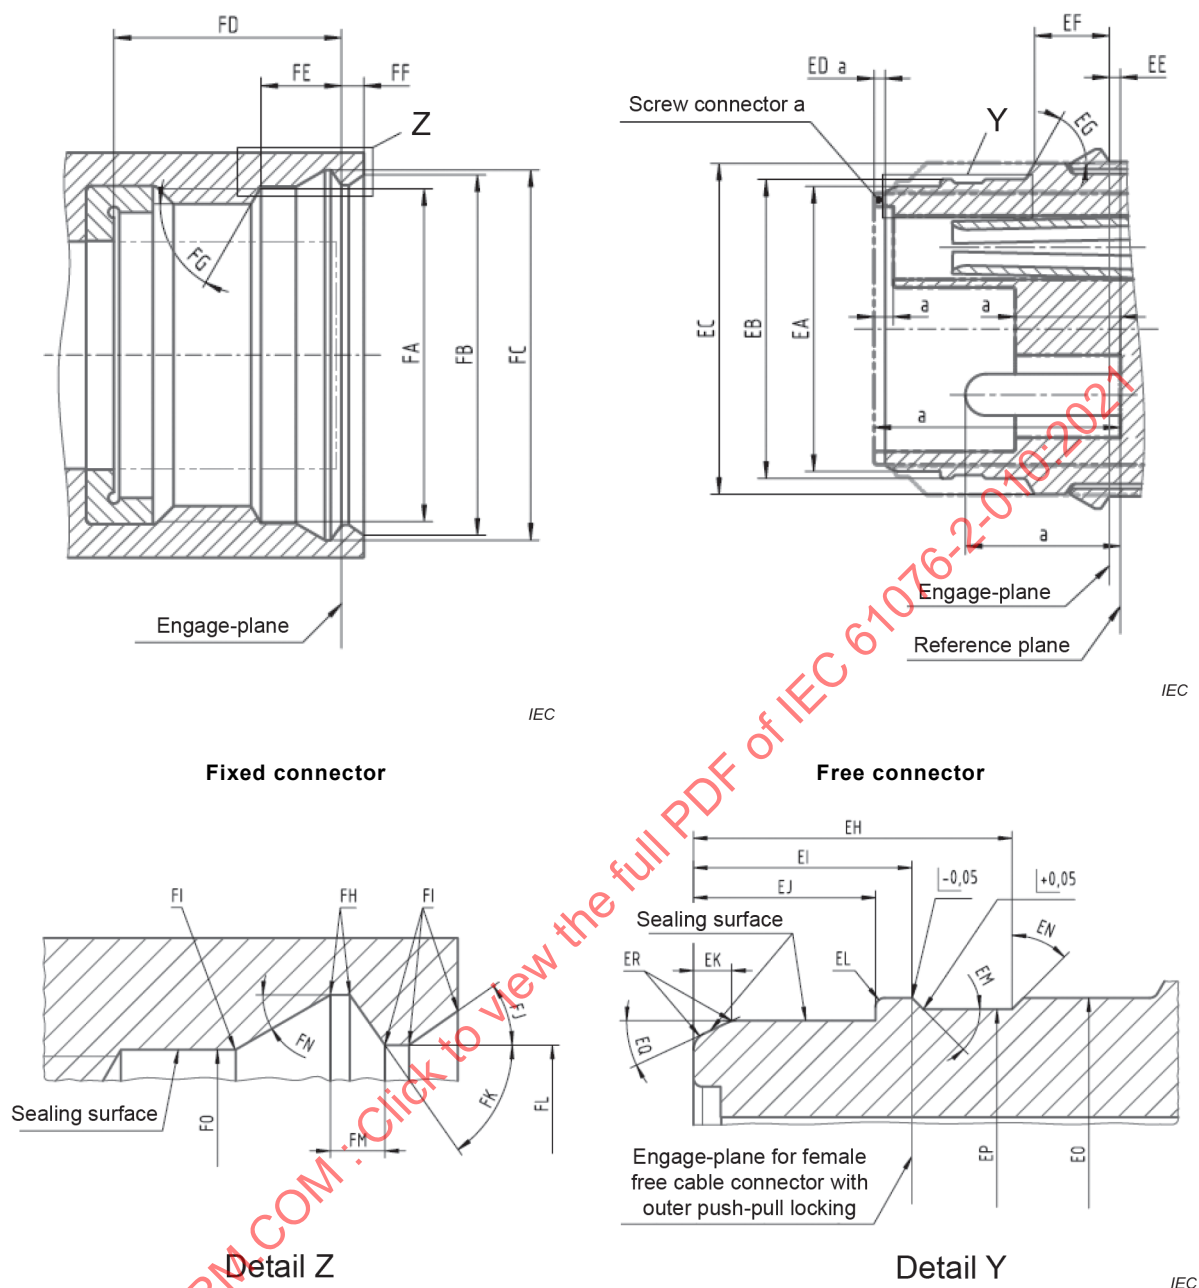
Inner push-pull-locking: female fixed connector side view and male free connector side view with details for both
